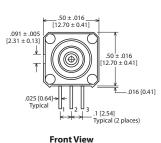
SHA12: Concentric Shafts, Solder Hooks, 2 Potentiometer(s) or RS + PP, 3/8" Bushing
